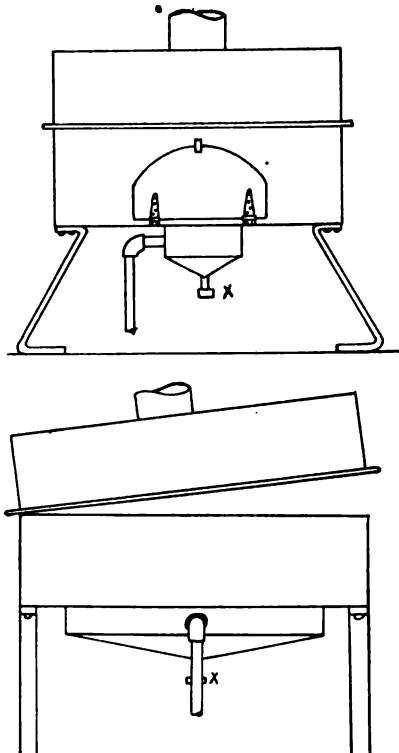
A SIMPLE SHEET IRON FORGE, EASILY BUILT
